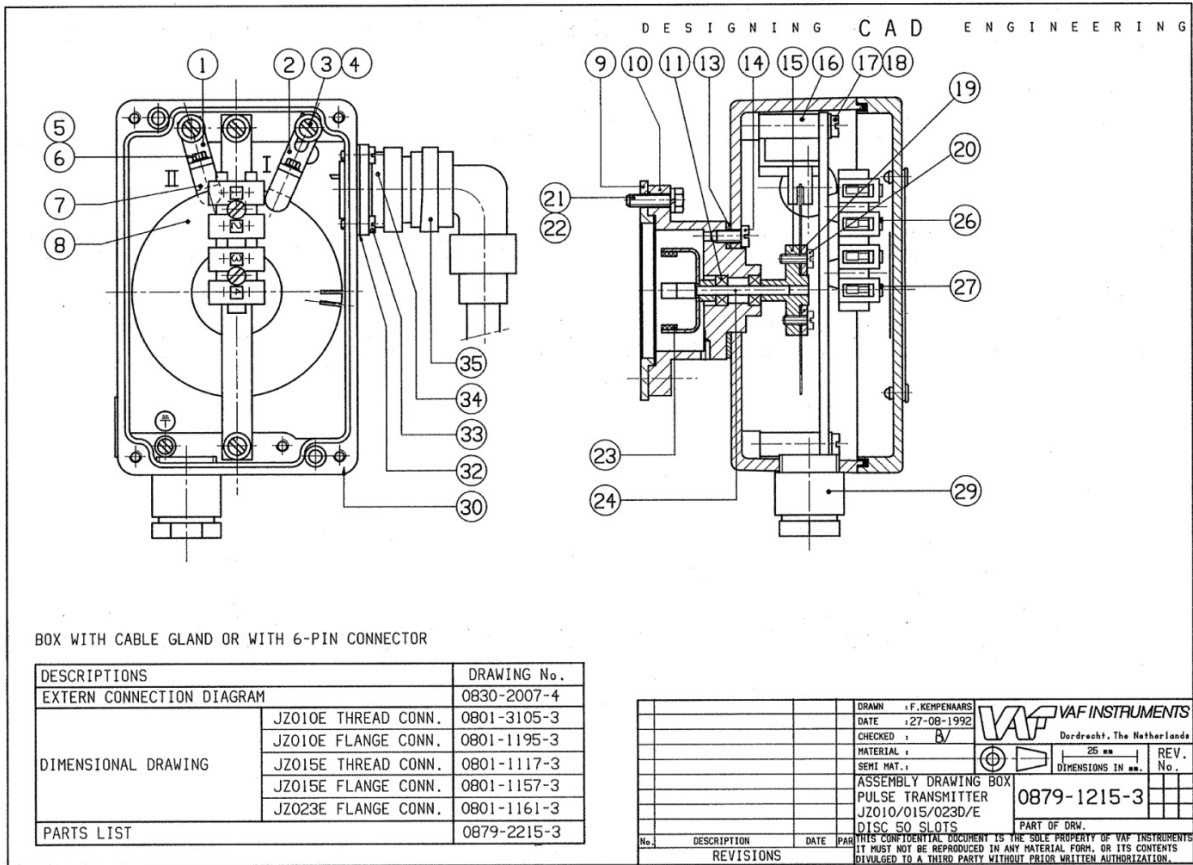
Drawing 0879-1215 – Pulse transmitter box assembly drawing
